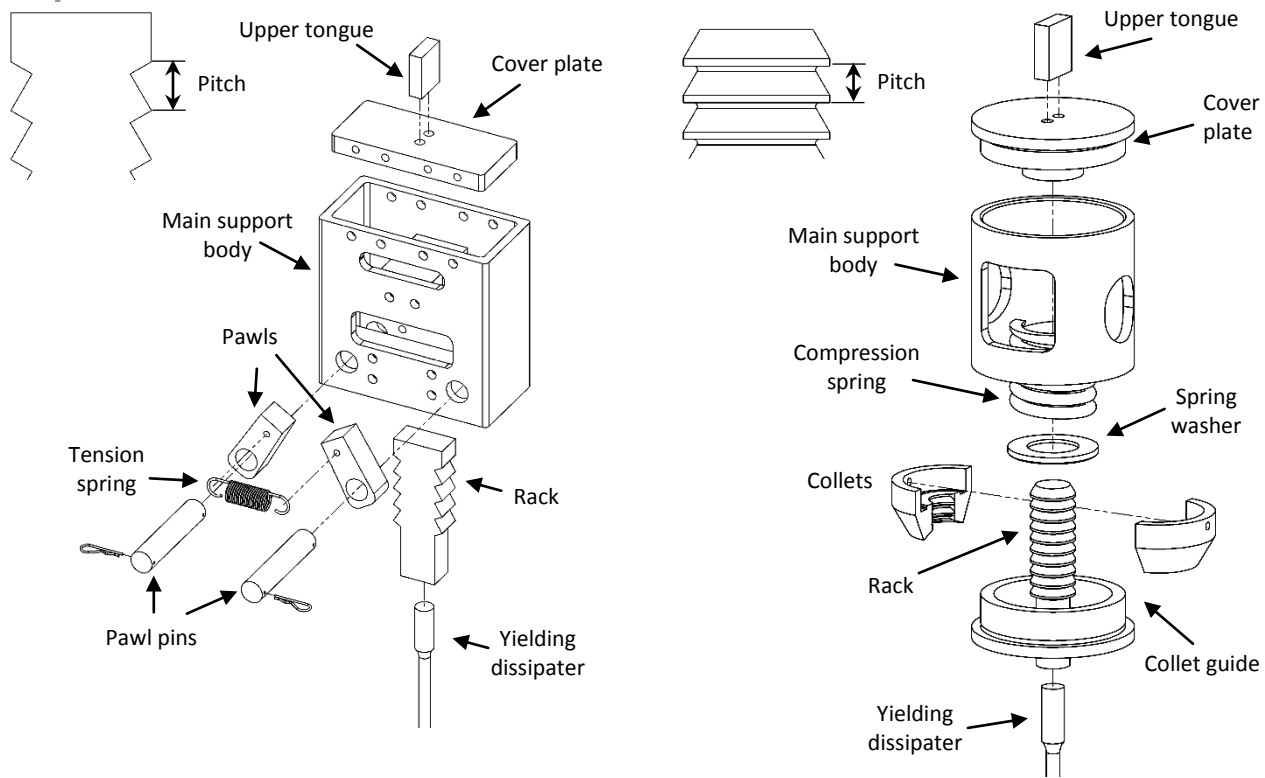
a) First, linear ratchet mechanism assembly; and b) Second, axisymmetric prototype. Pitch dimensions are shown in inserts.
